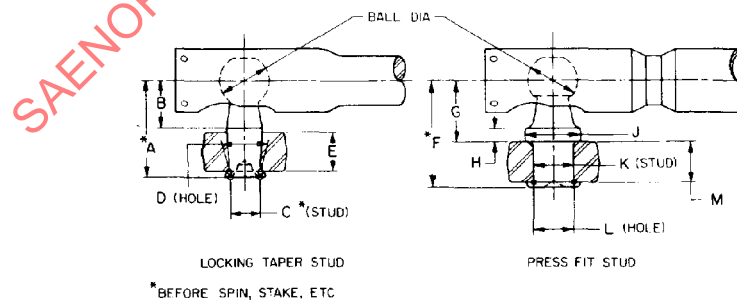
TYPICAL TUBULAR ("HORIZONTAL TYPE") SOCKET ASSEMBLY FOR RIVETED, SPUN, STAKED, WELDED, OR THREADED TAPER STUD ATTACHMENT.
